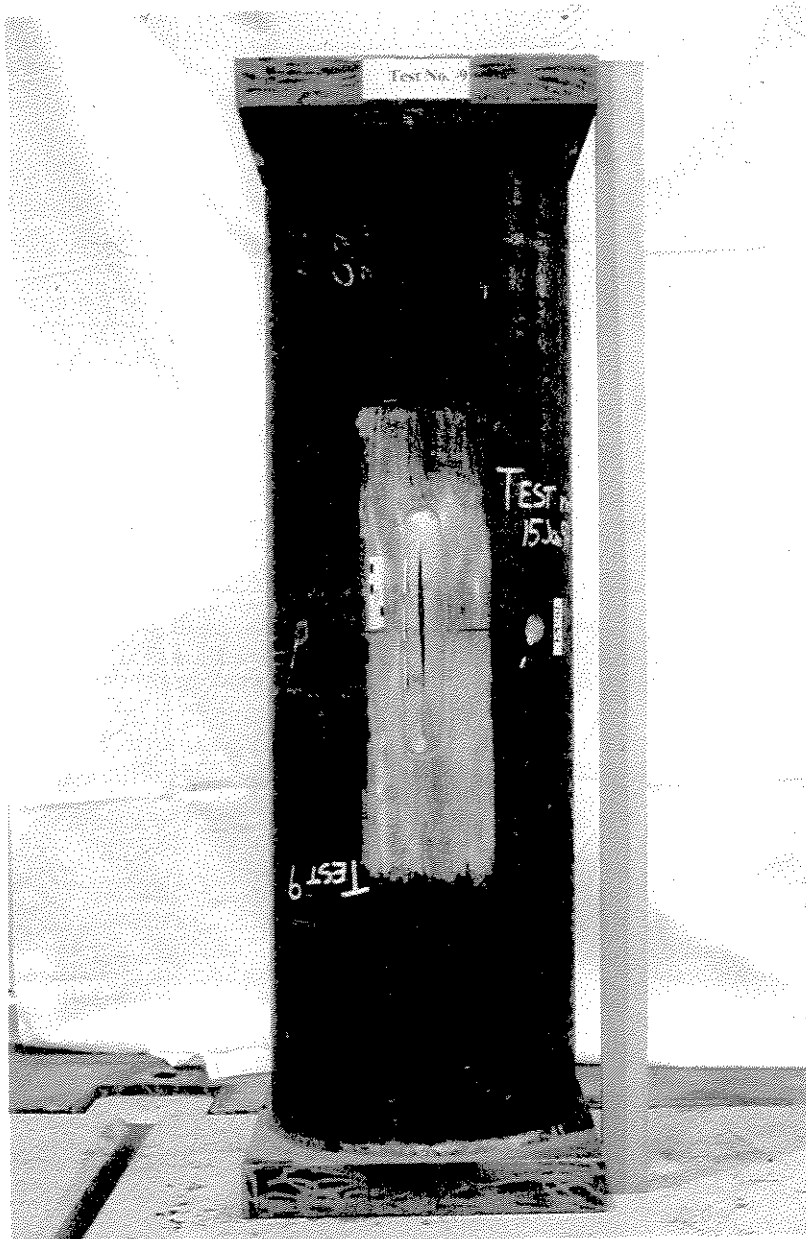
Picture of the test specimen no. 9 after the burst test
